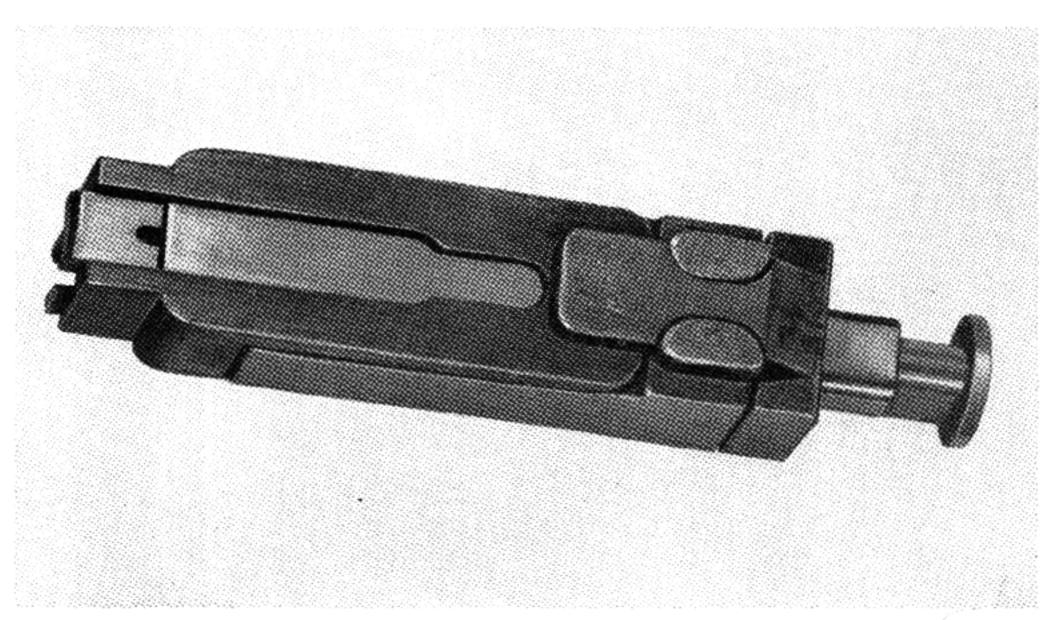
7. Symmetrical locks, pivoting in the bolt body: this method is employed in all Degtylarev-designed machine guns.
